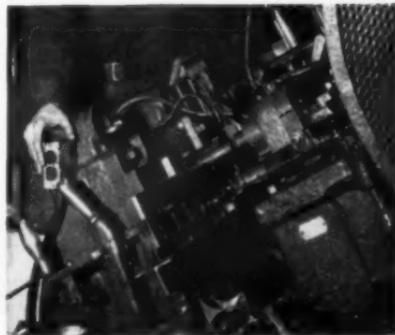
Long view of three stages of trim, restrike, blanking and flanging of various openings and holes in the skirt.
